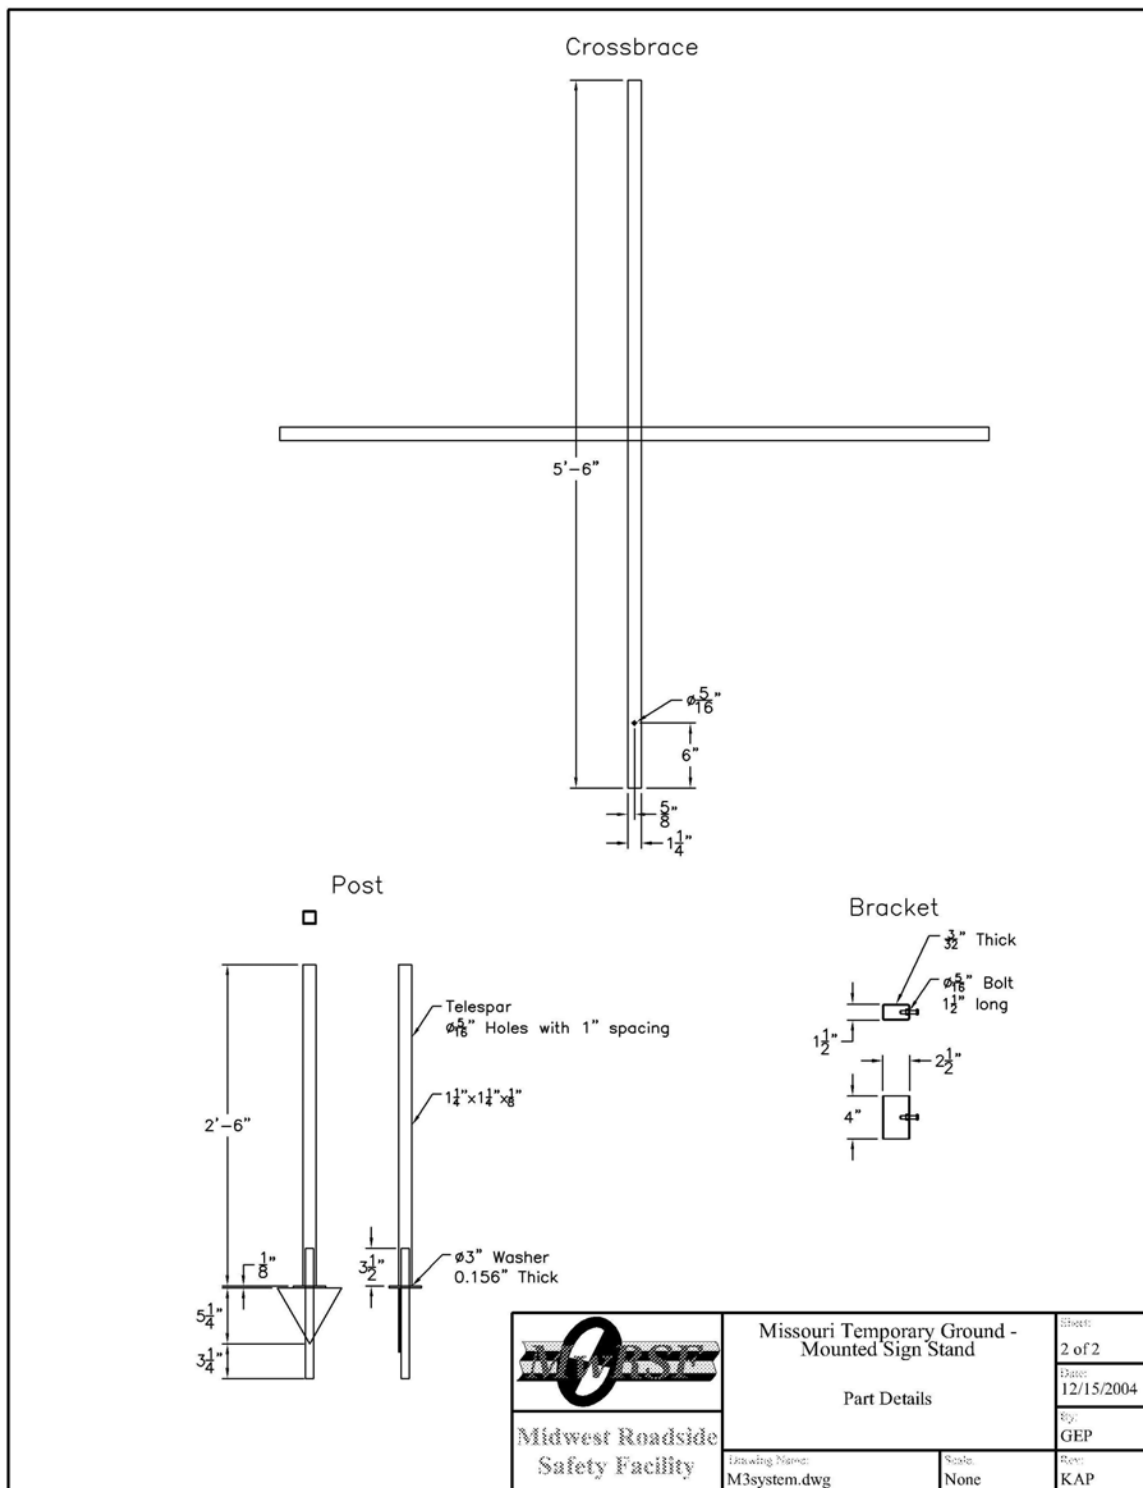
System No. 3 Sign Support Details, Test M-3 (English)
